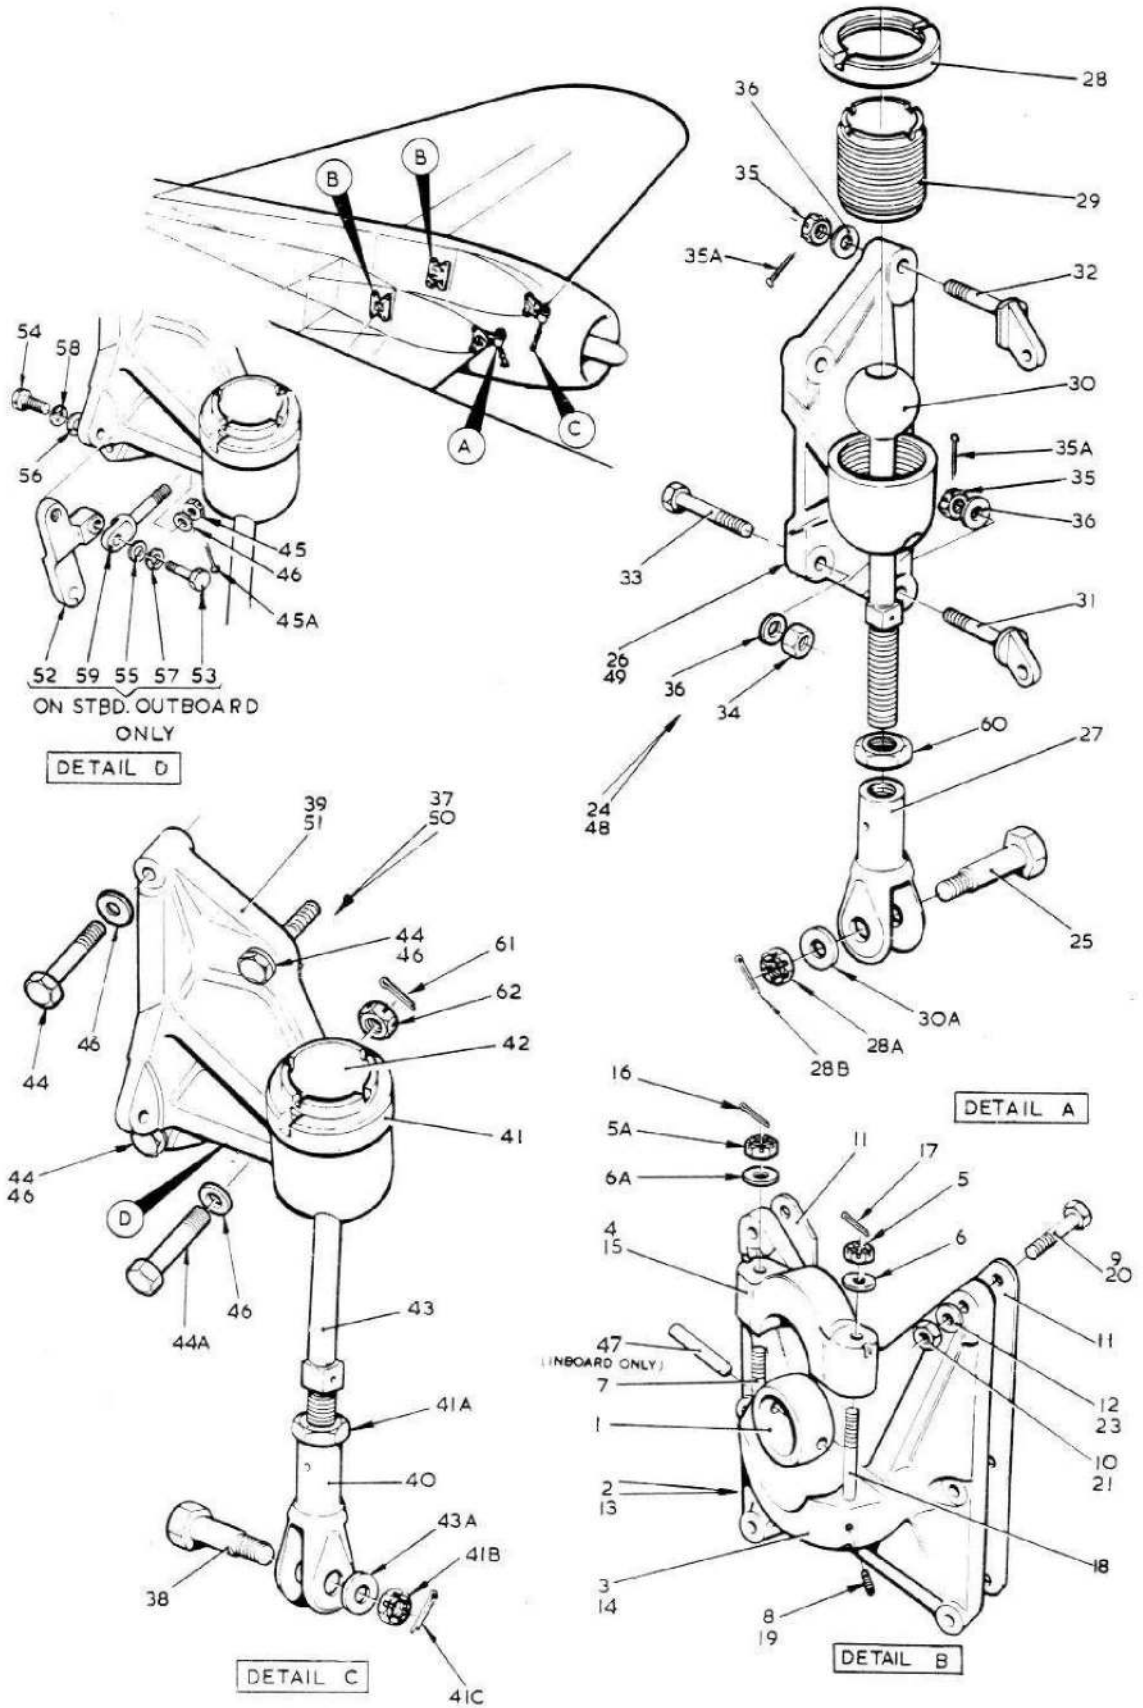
ENGINE MOUNTINGS & ATTACHMENTS PORT & STBD
